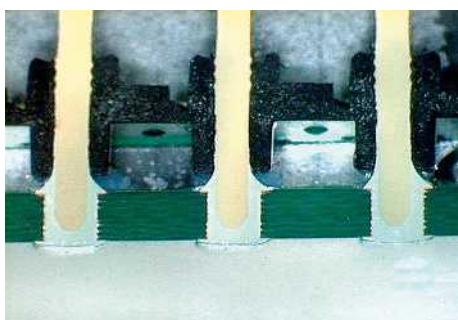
Assessment of the fill level for a 1.4 mm pin in a 1.6 mm thick PCB
